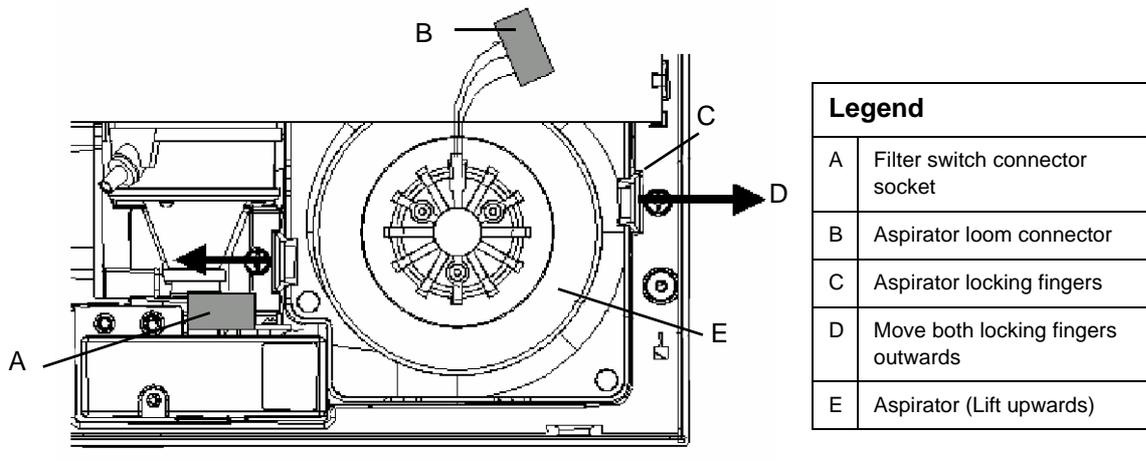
Removing CPU Card and Disconnecting Aspirator Cable Loom
